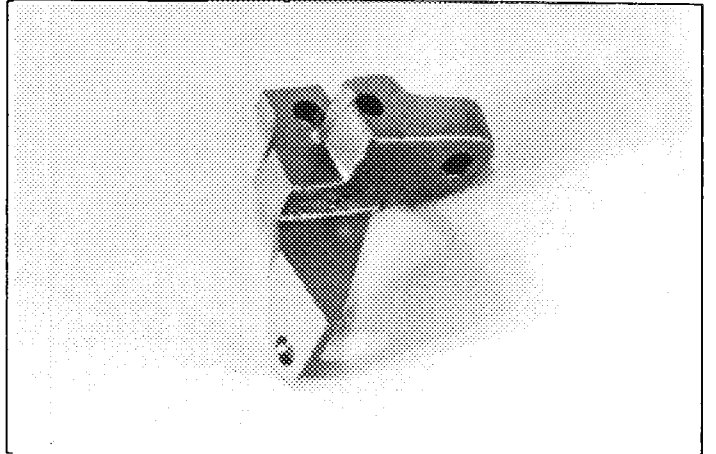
Heavy duty steering knuckle arm TYPE C
